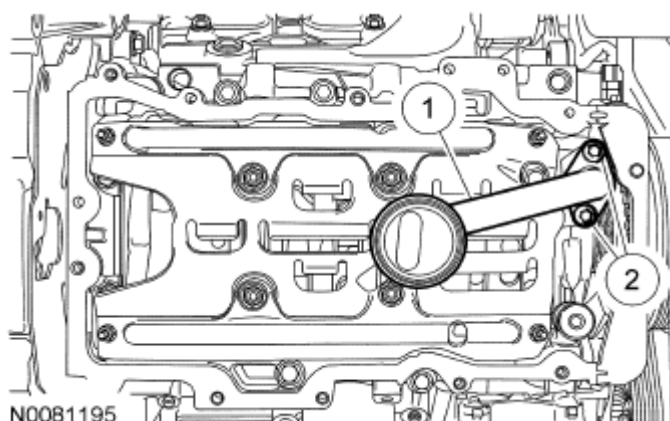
Positioning Oil Pump Screen And Pickup Tube
